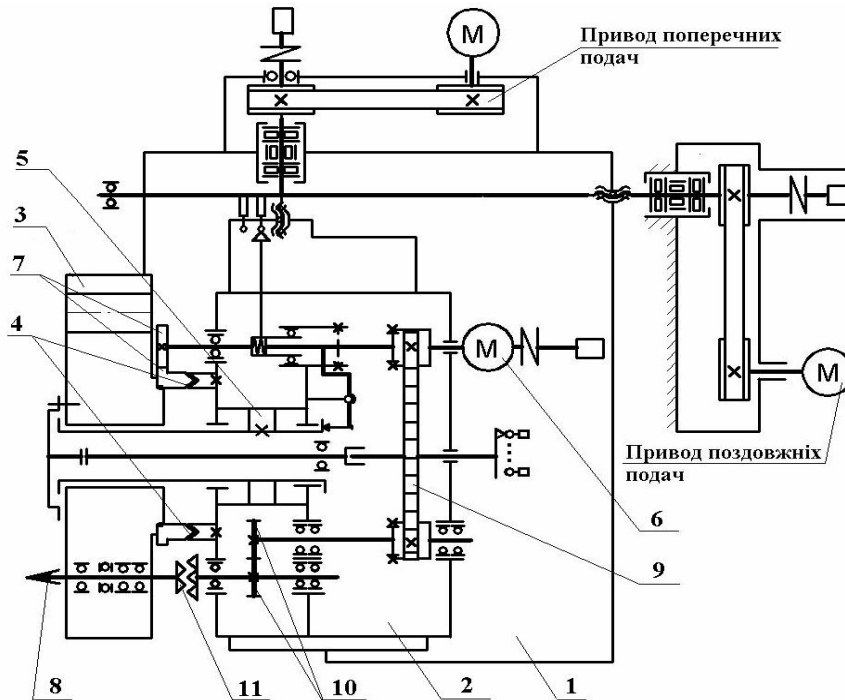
Kinematic scheme of the turret carriage of a CNC lathe
